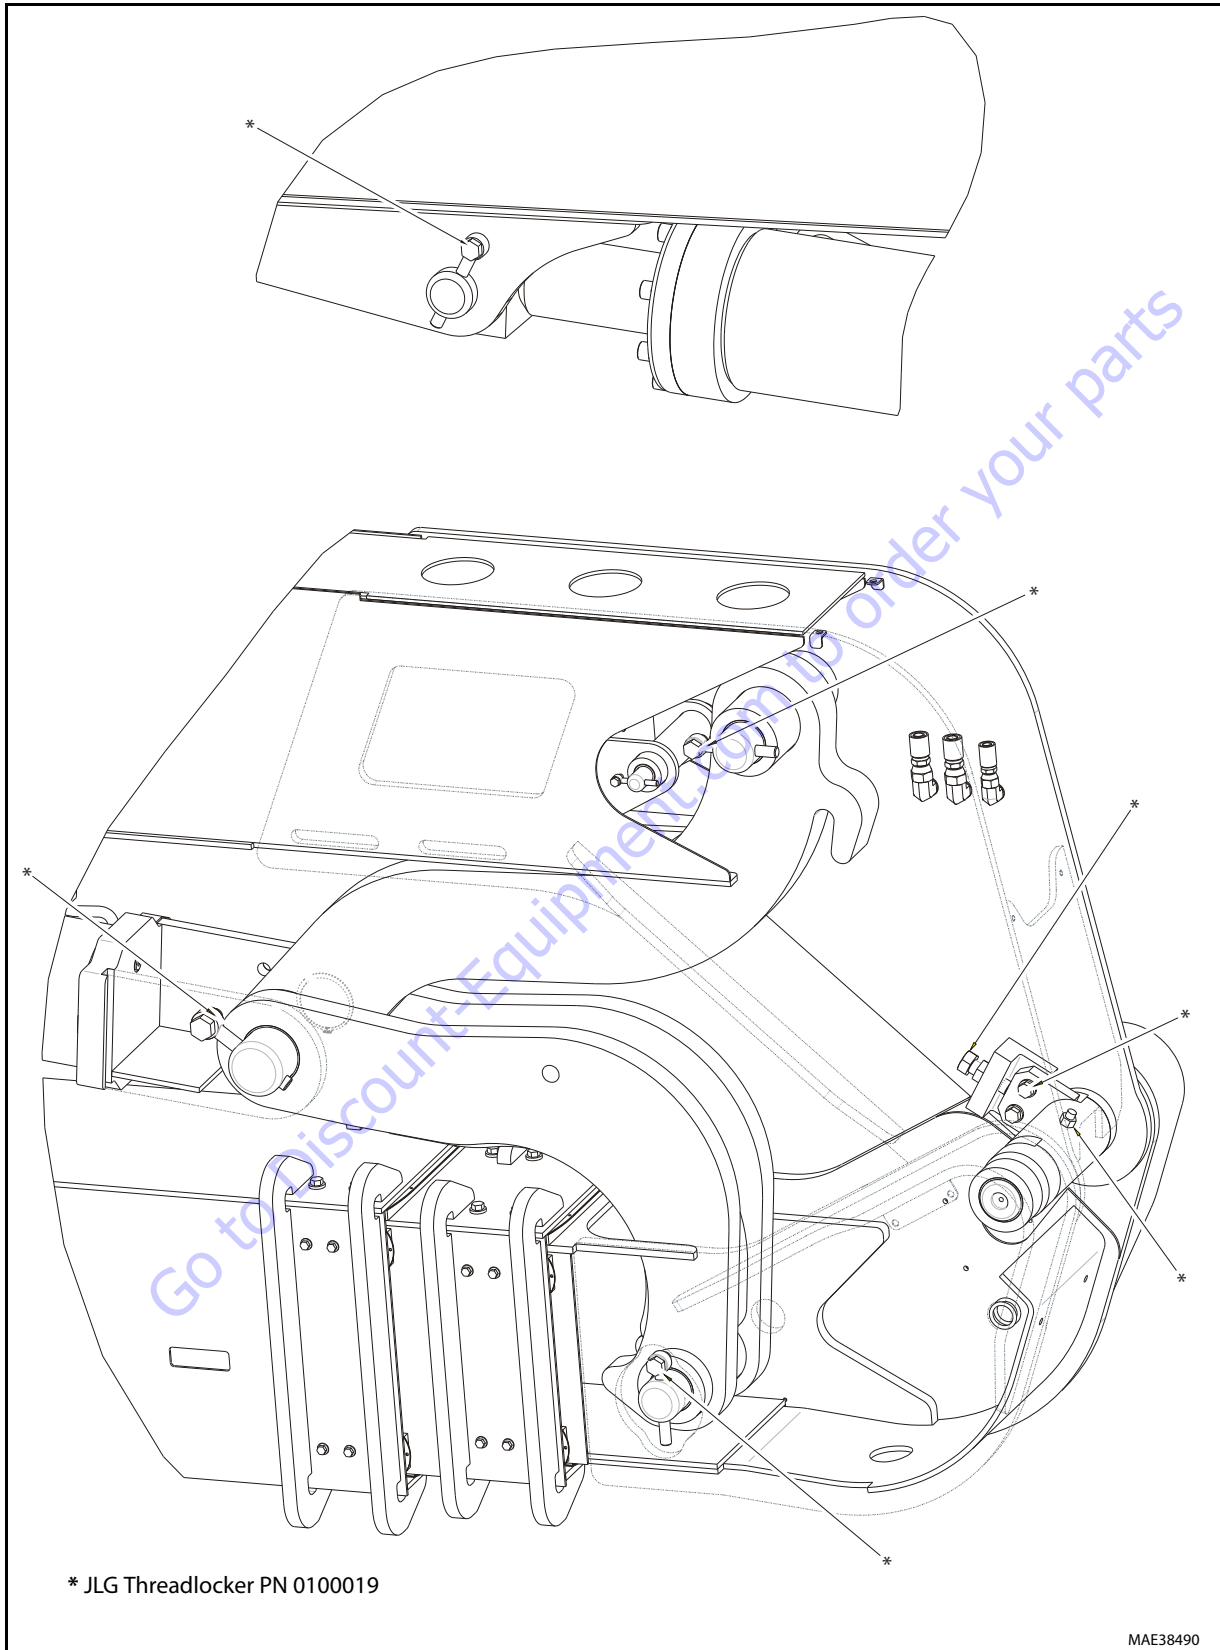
Locations for JLG Threadlocker Application - Sheet 5 of 5
